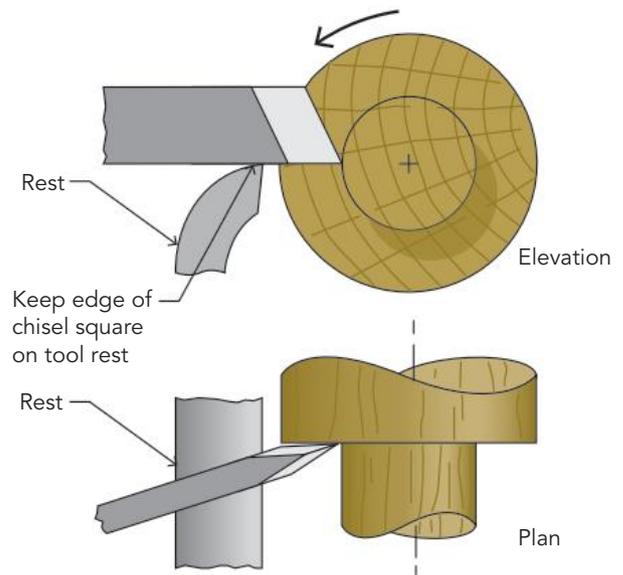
Top and side view of turning a shoulder with the toe of the skew chisel
